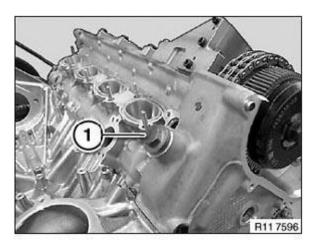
Identifying VANOS Gear O-Ring Courtesy of BMW OF NORTH AMERICA, INC.
